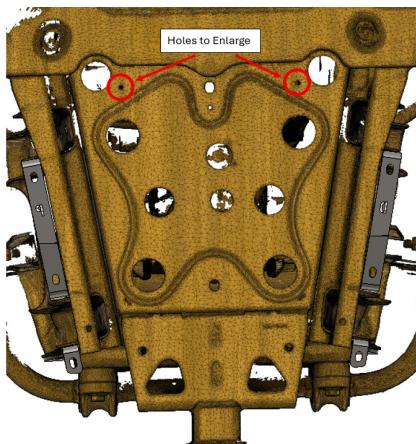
& FIG 5 - Enlarge holes in bottom of frame
